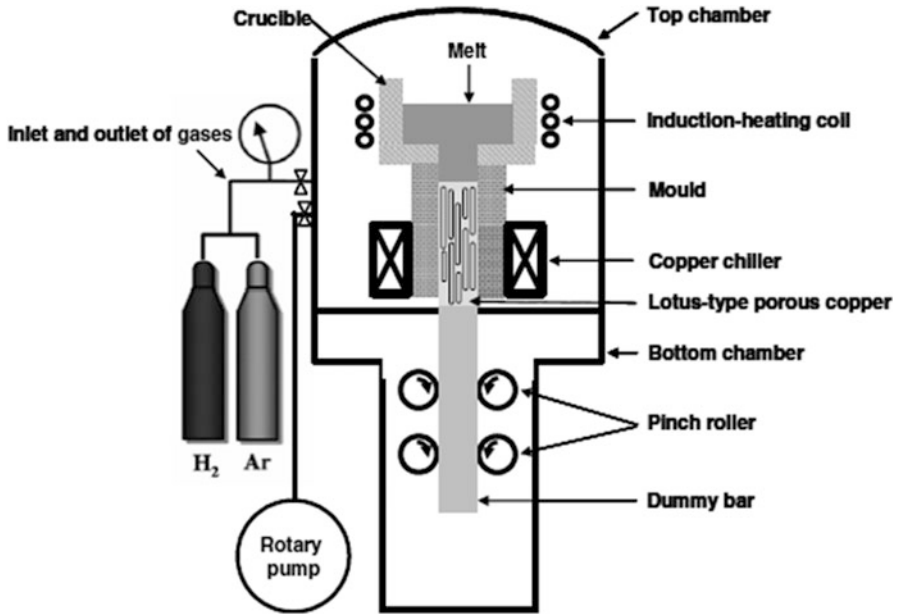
Schematic drawing of continuous casting apparatus (Reprinted with permission from [24]. © 2007 Acta Materialia Inc.)
